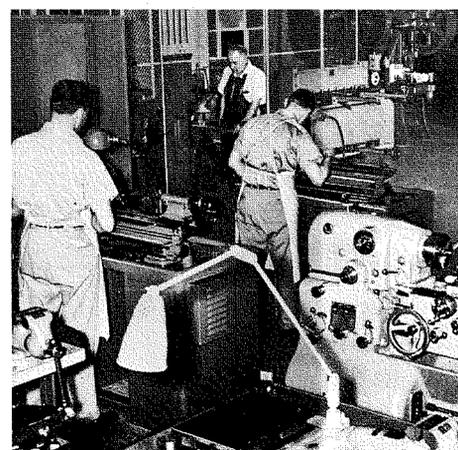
A general view of the Methods and Process Laboratory machine shop. This shop provides tools, parts, and fixtures for all of Engineering. Some equipment maintenance for Manufacturing is performed here as well.
